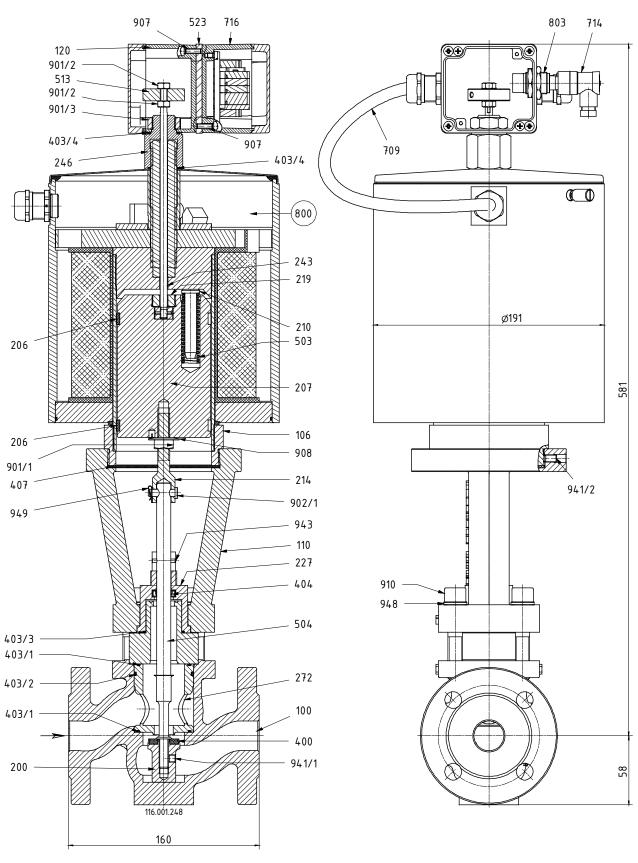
sectional drawing 40-EVF-R.. (PN 40)
